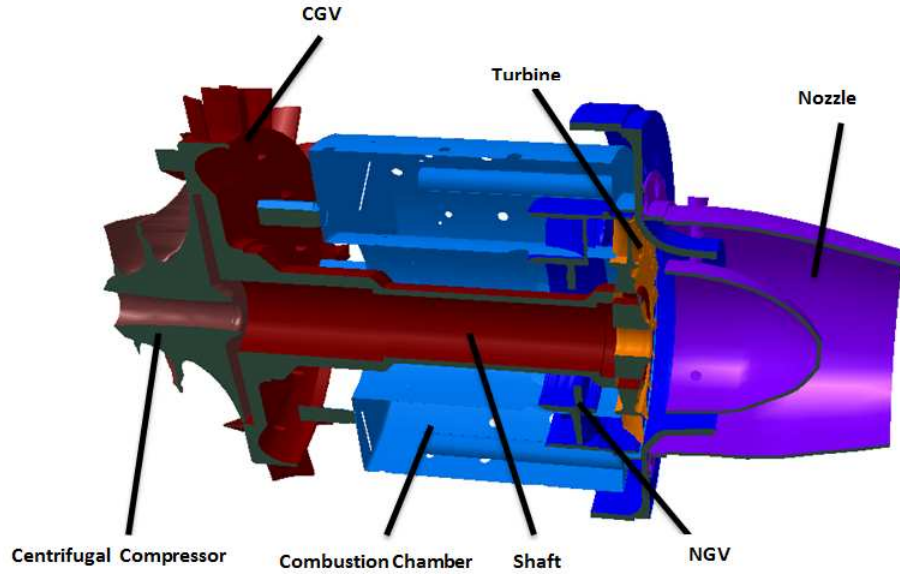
Assembly of the Simjet 2300-S-25 AES-GE Engine
